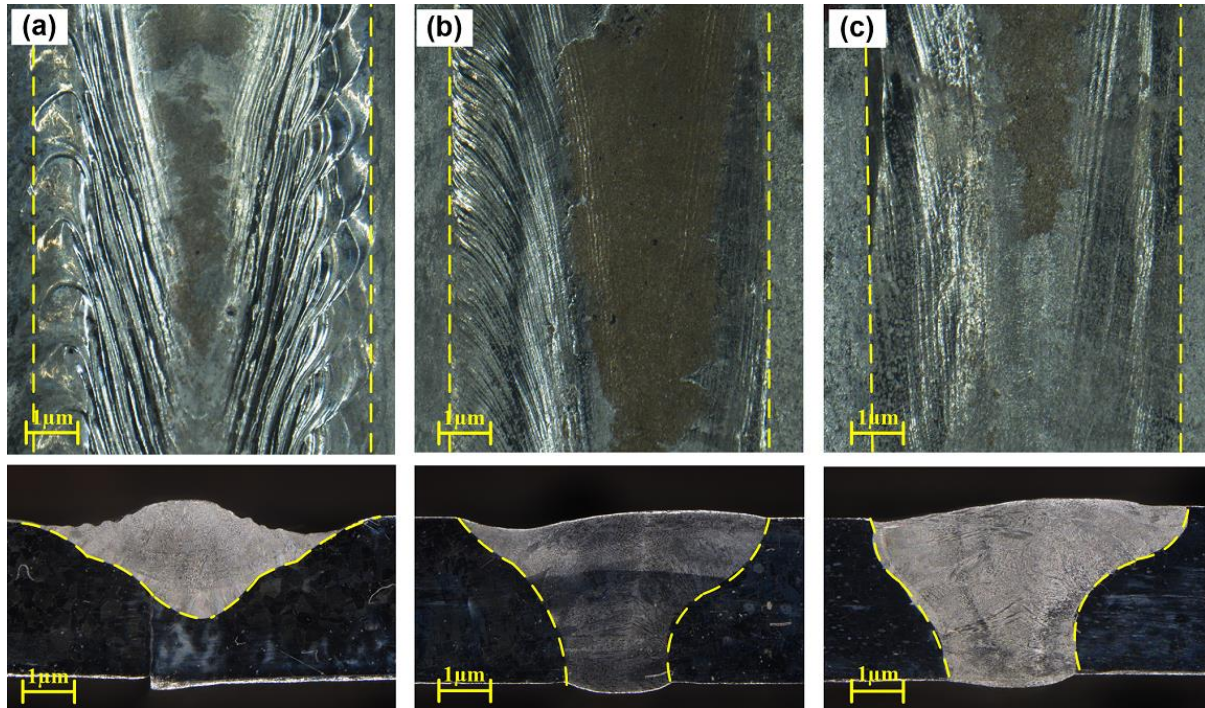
Cross-sectional view of the EBW welded Inconel 825 of: (a) sample 1; (b) sample 2; (c) sample 3.
